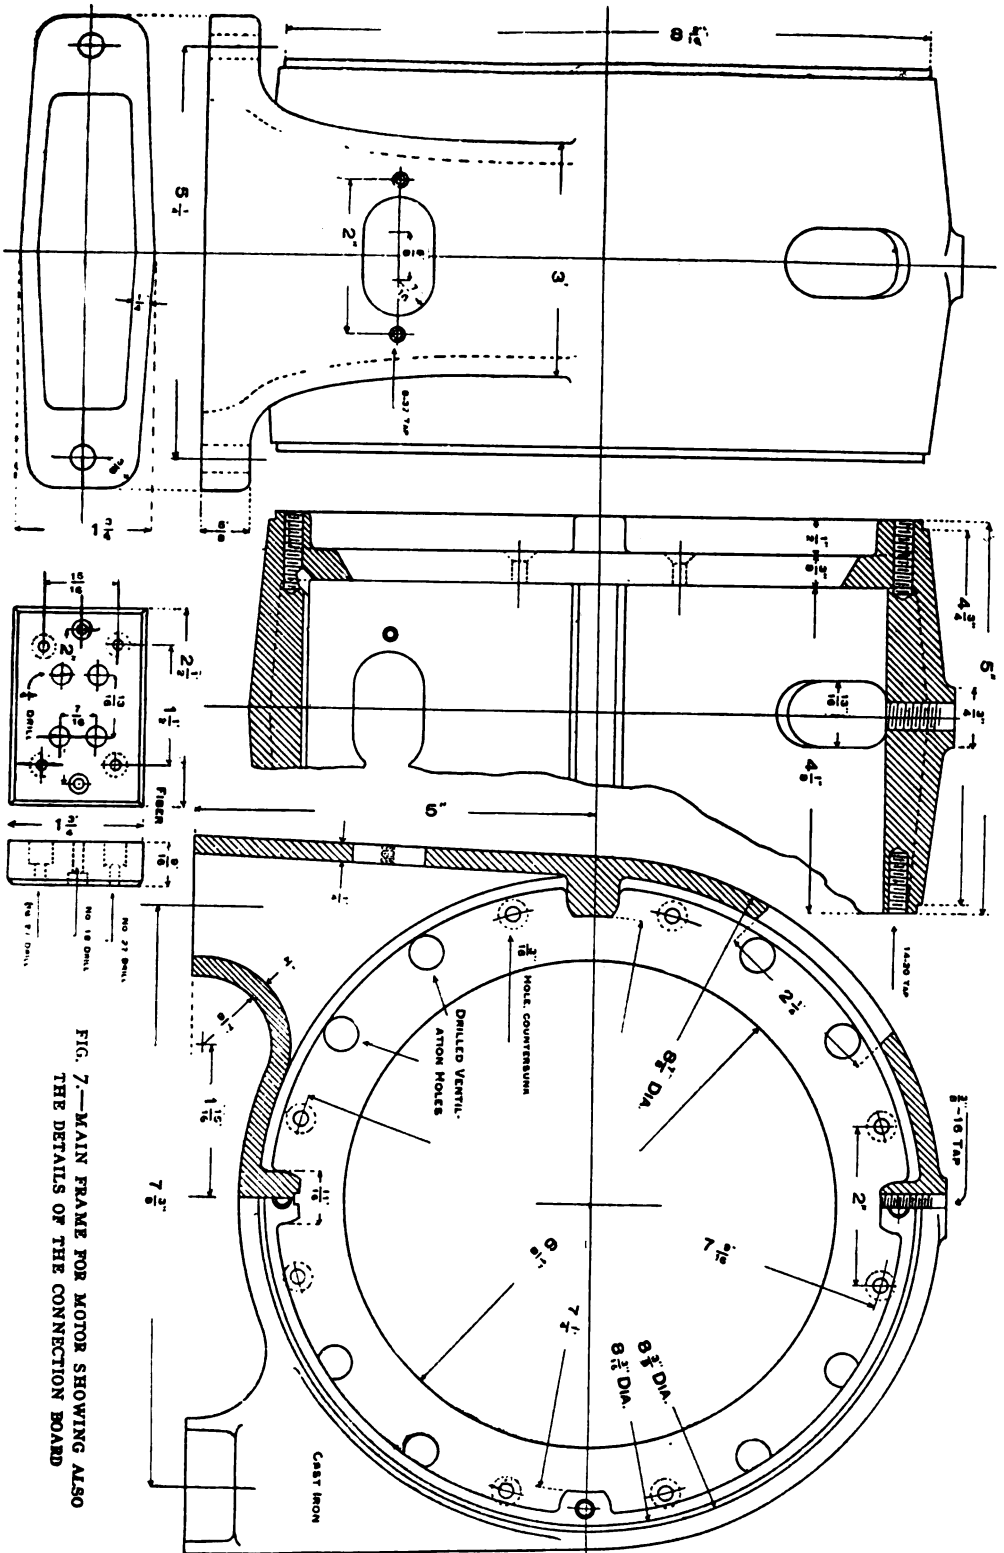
MAIN FRAME FOR MOTOR SHOWING ALSO THE DETAILS OF THE CONNECTION BOARD
